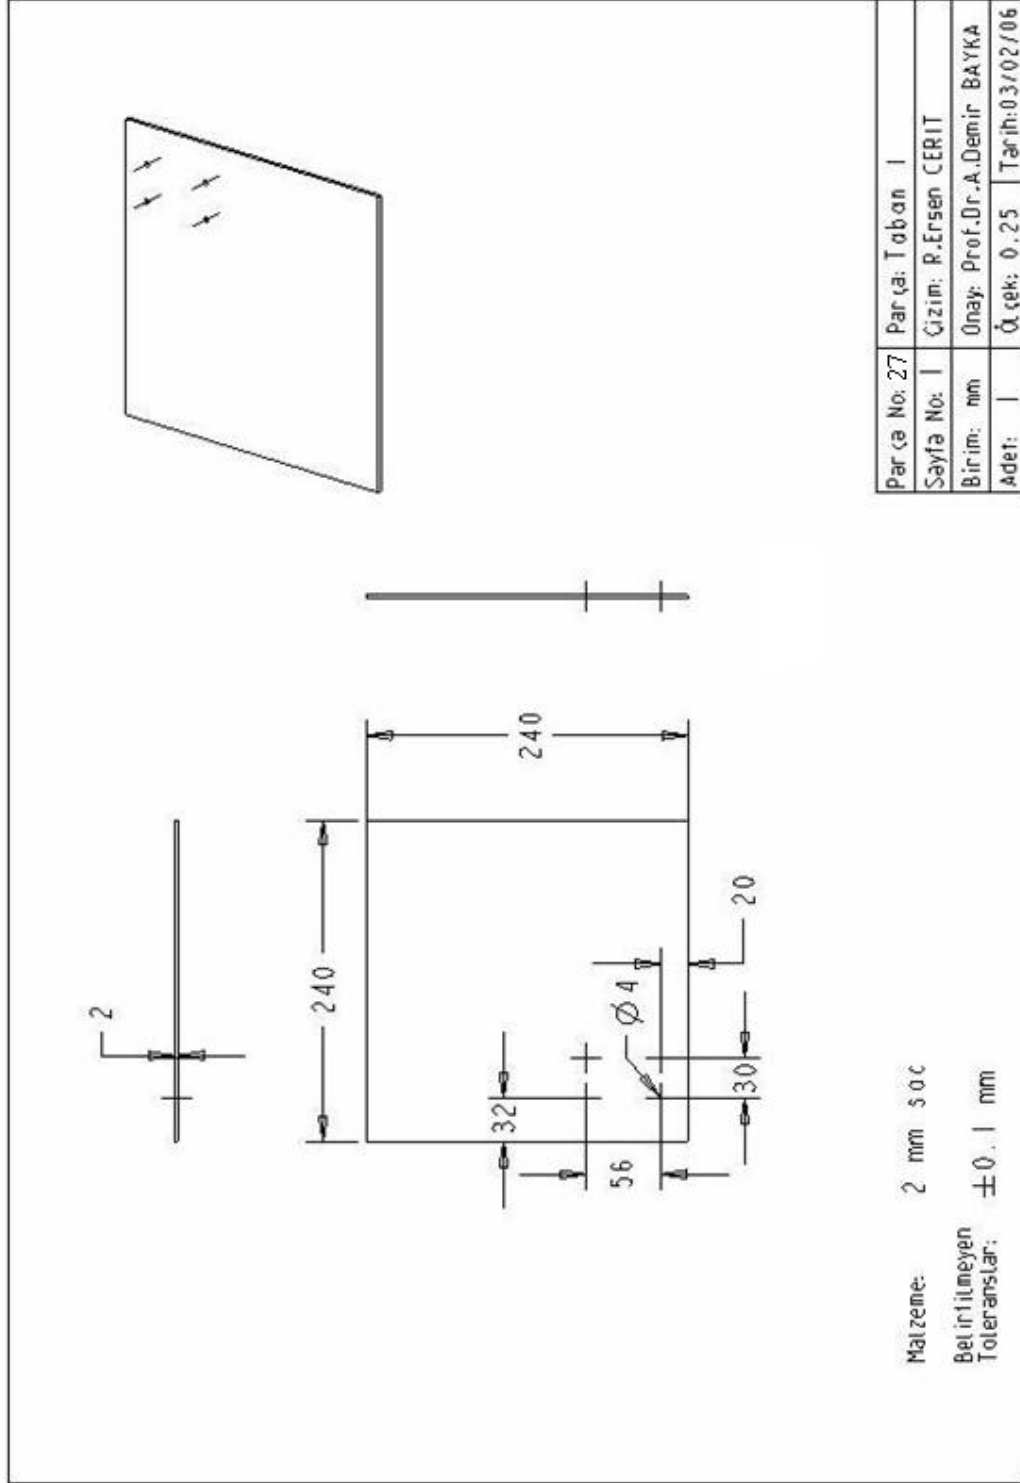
Technical Drawing of Filter Holder Support Surface.
